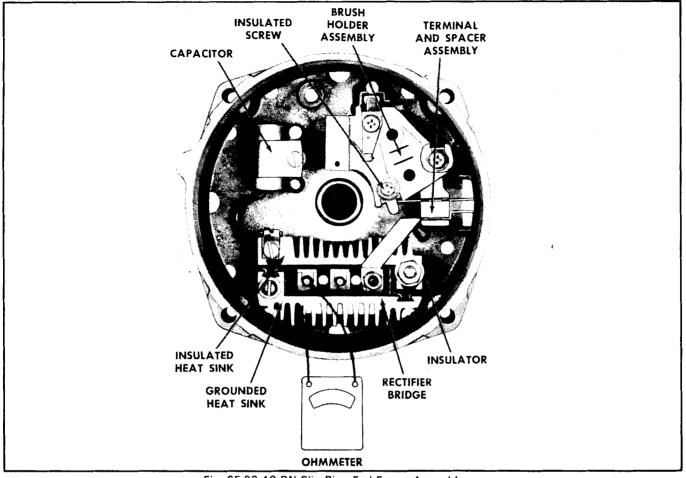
E-33 10 DN Slip Ring End Frame Assembly
